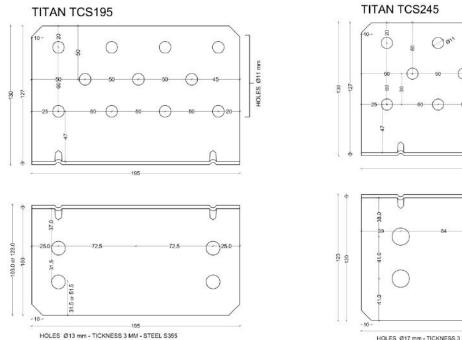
Dimensions of Angle Bracket Titan TCS195
